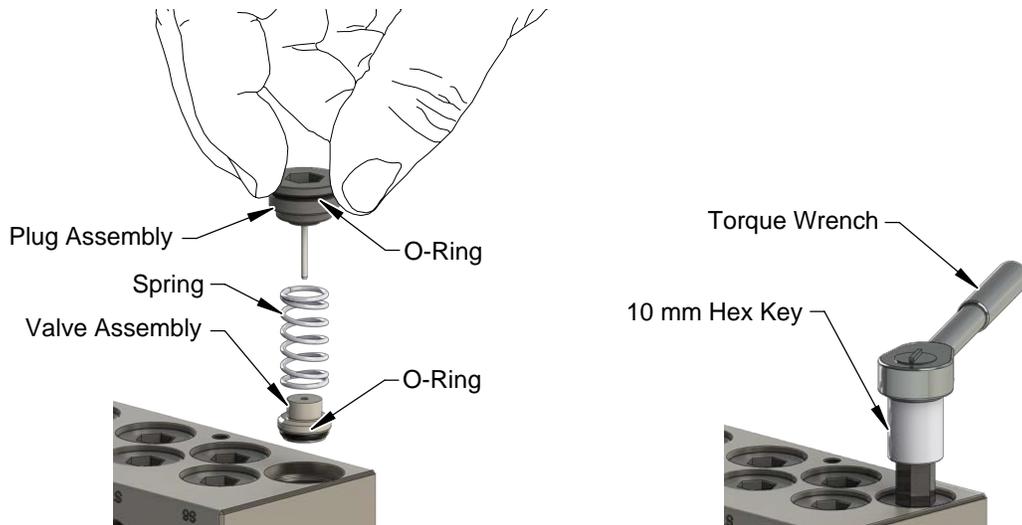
Tool Self-Sealing Valve (Disassembly)
